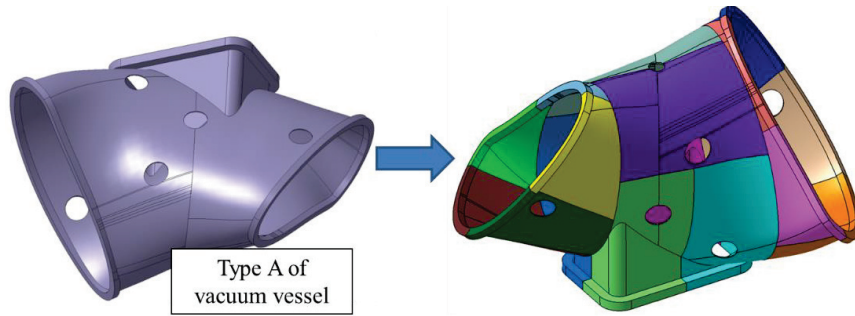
Type A of VV is cut into 16 pieces to print by 3-D printer.
